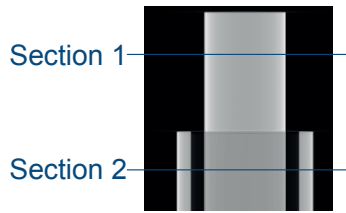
Simulation of a pin inside a hollow cylinder, measurements have been performed in sections 1 and 2.
